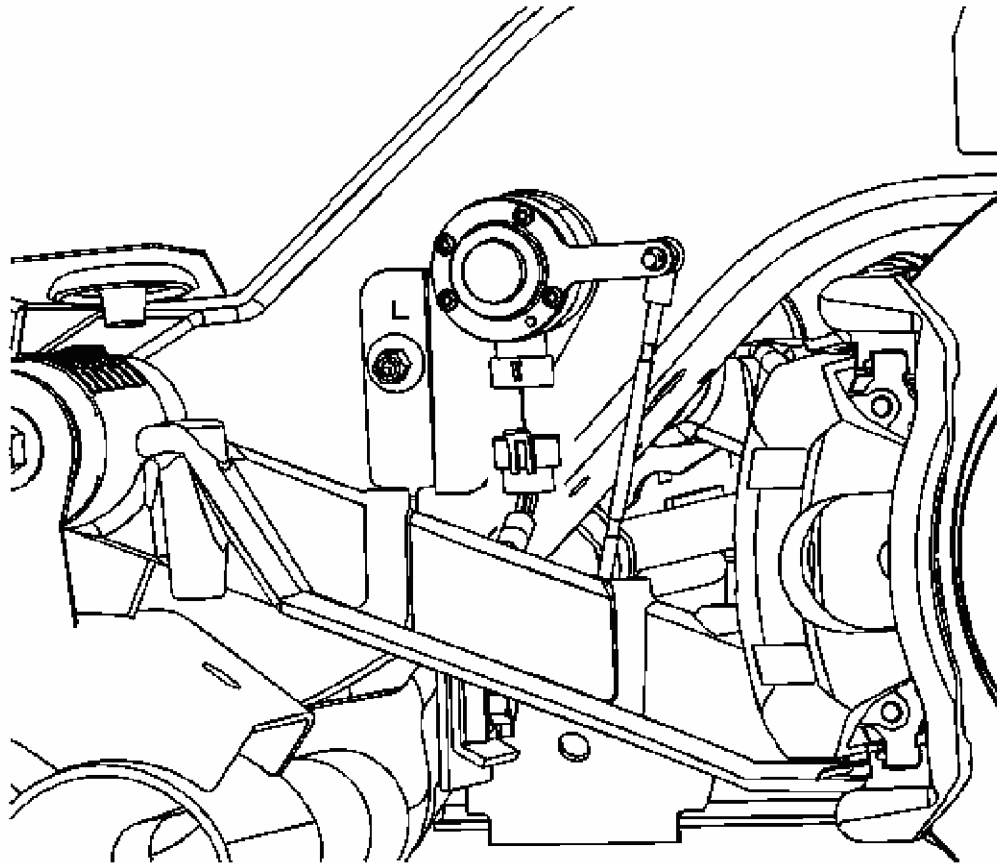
Identifying Rear Position Link, Sensor & Connector
